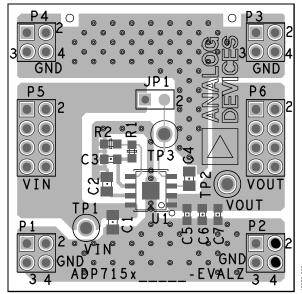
ADP7159RD-04-EVALZ (8-Lead SOIC) PCB Layout
